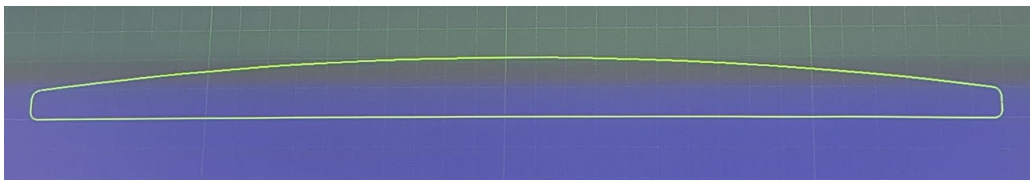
Profile section view of the boards top, bottom and side surfaces in the center of the board
